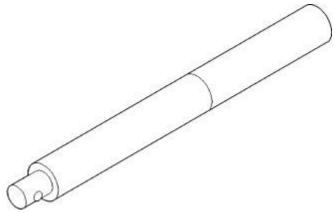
INSTALLER, SEAL - 8348 Courtesy of CHRYSLER LLC
